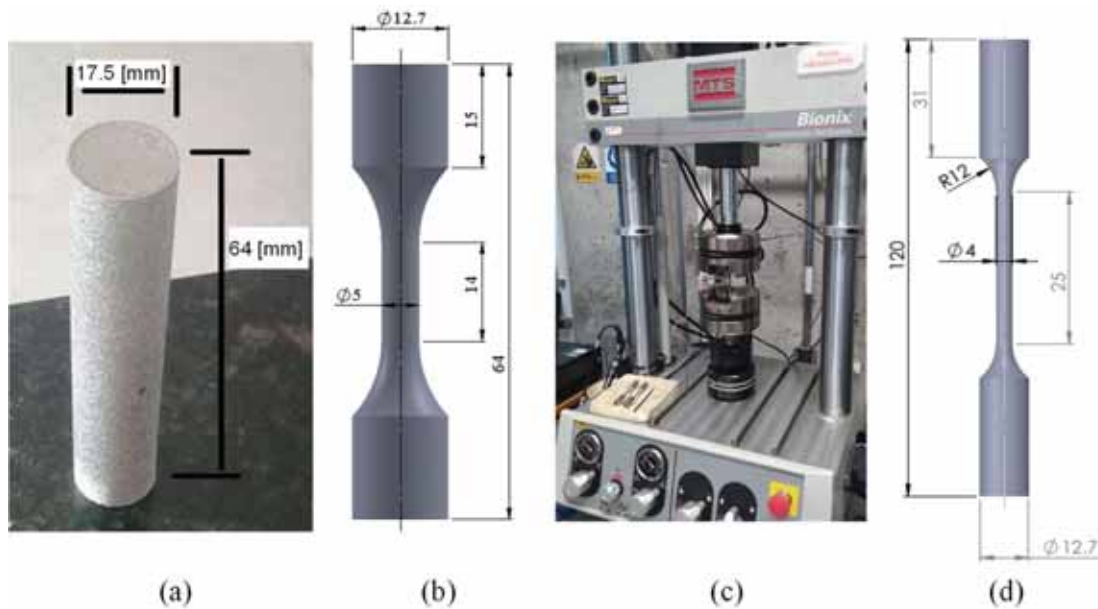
Test specimens: (a) as printed by EBM; (b) machined dimensions (mm) for fatigue tests; (c) testing of a specimen with an extensometer; (d) machined dimensions (mm) for static tensile tests.
